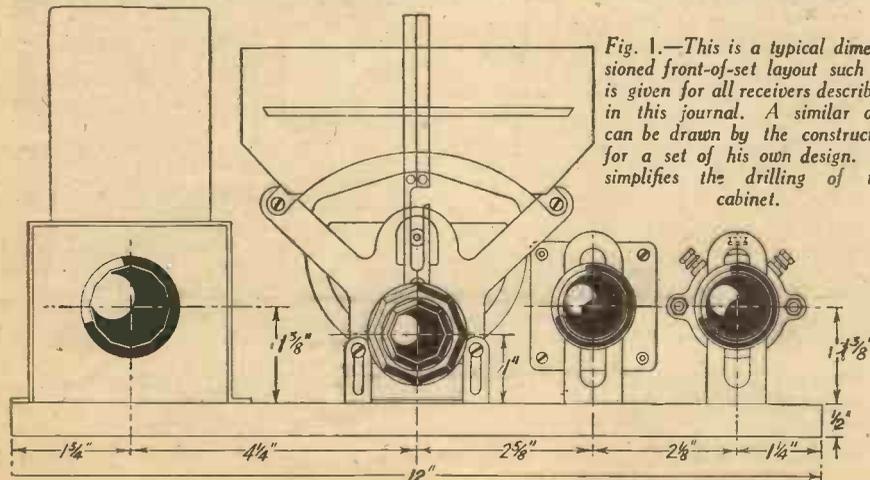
This is a typical dimensioned front-of-set layout such as is given for all receivers described in this journal. A similar one can be drawn by the constructor for a set of his own design. It simplifies the drilling of the cabinet.
